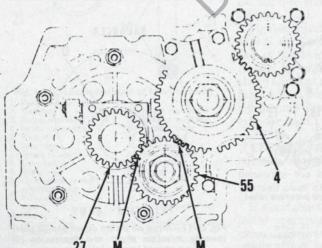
View showing location of timing marks (M) on camshaft gear (4), crankshaft gear (27) and oil pump gear (55).
